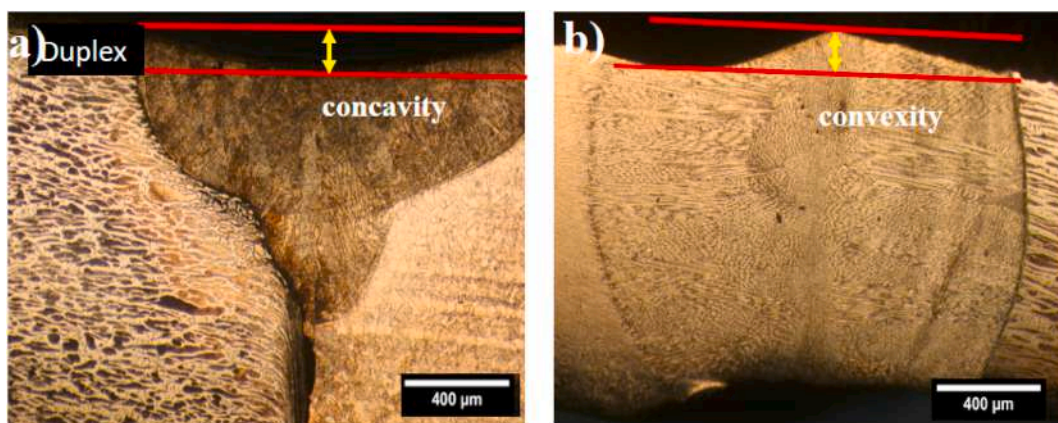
Appearance of weld surface shape for a) concavity, b) convexity.
